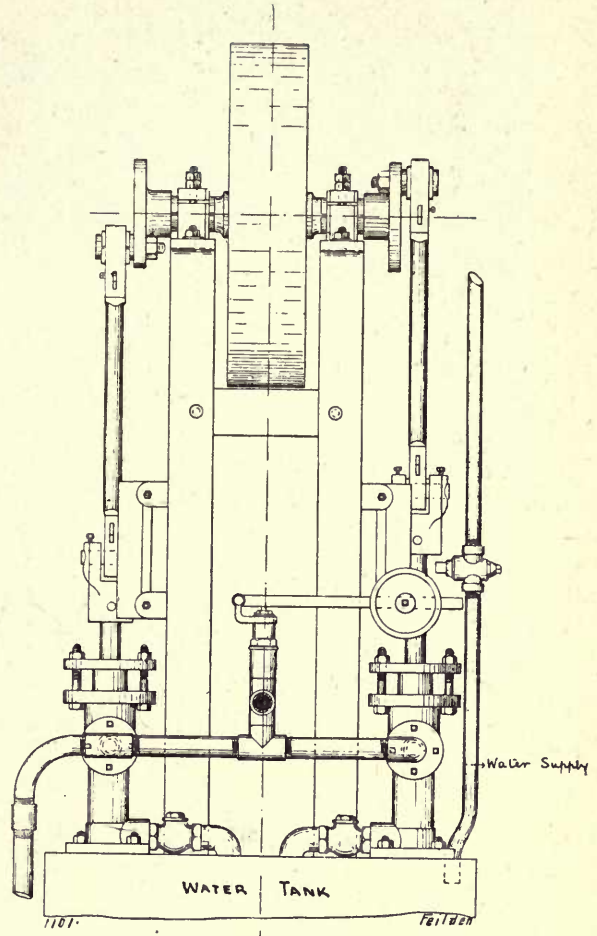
ELEVATION OF HYDRAULIC PUMPS FOR RAISING PURIFIER COVERS
